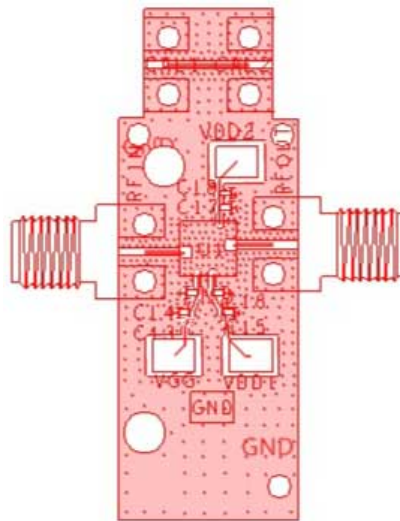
ADL8106-EVALZ Assembly Drawing (CAL1 and CAL2 Not Installed)
